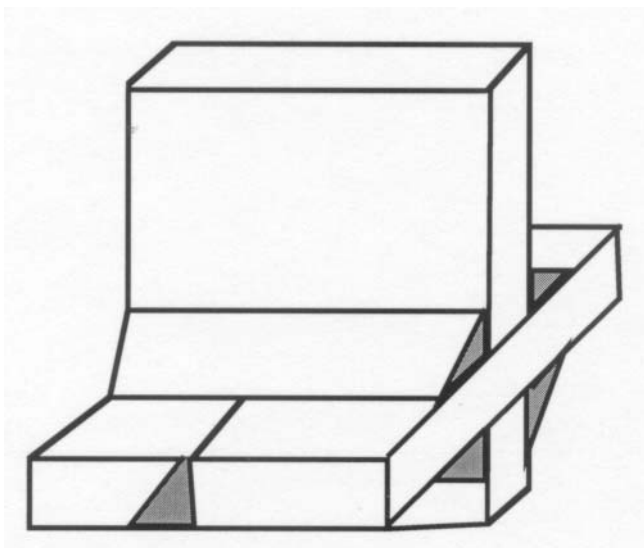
A general weld is a mixture of fillet and butt welds.
